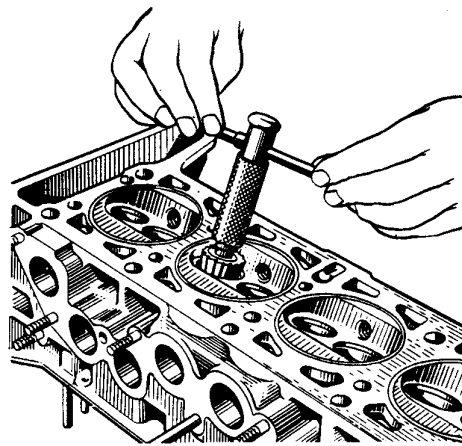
Chamfering Valve Seat Face with Counterbore Installed on Spindle A.94058
